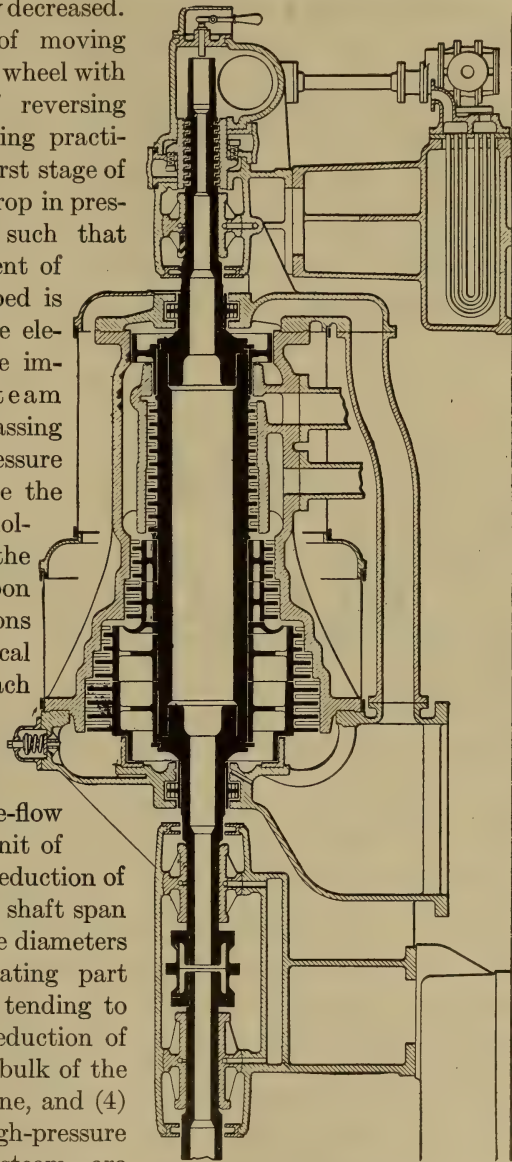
Section through Allis-Chalmers Steam Turbine.
